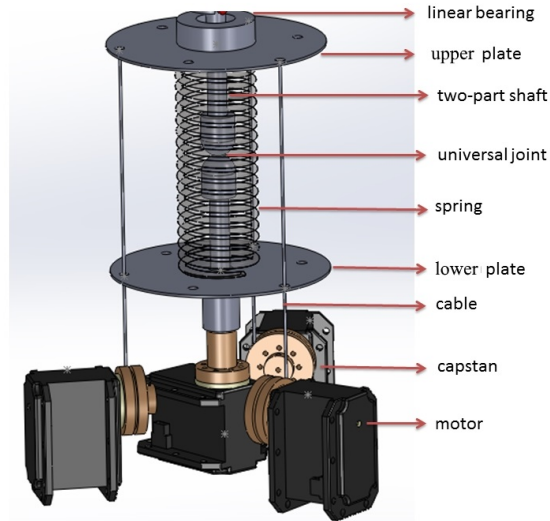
CDPS mechanism and its components, with motors, bearings and capstans.
